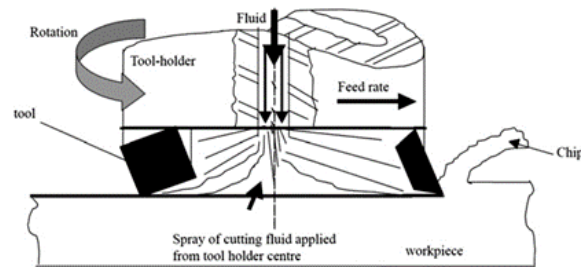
View of a through-the-tool MQL cooling system designed for face-milling [117].
